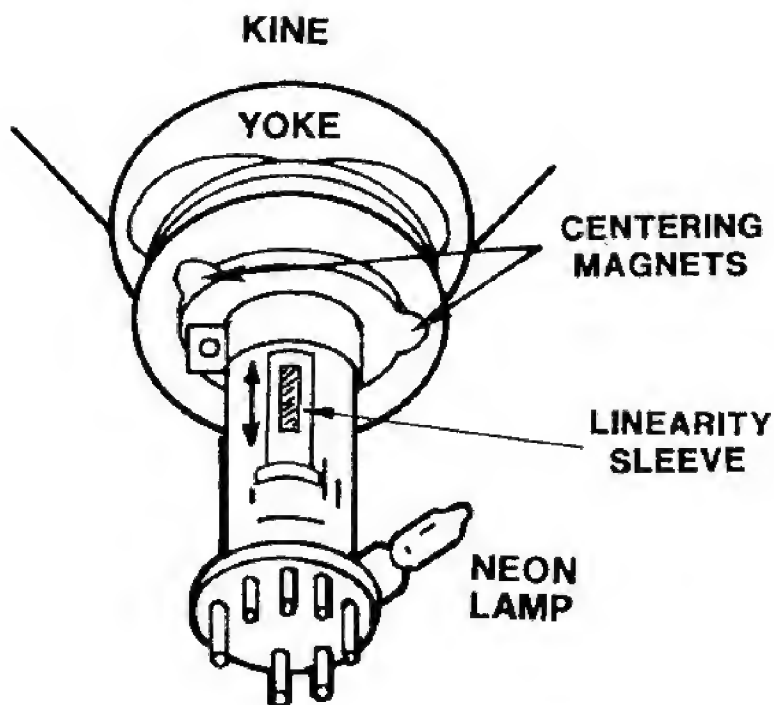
DEFLECTION YOKE ASSEMBLY
